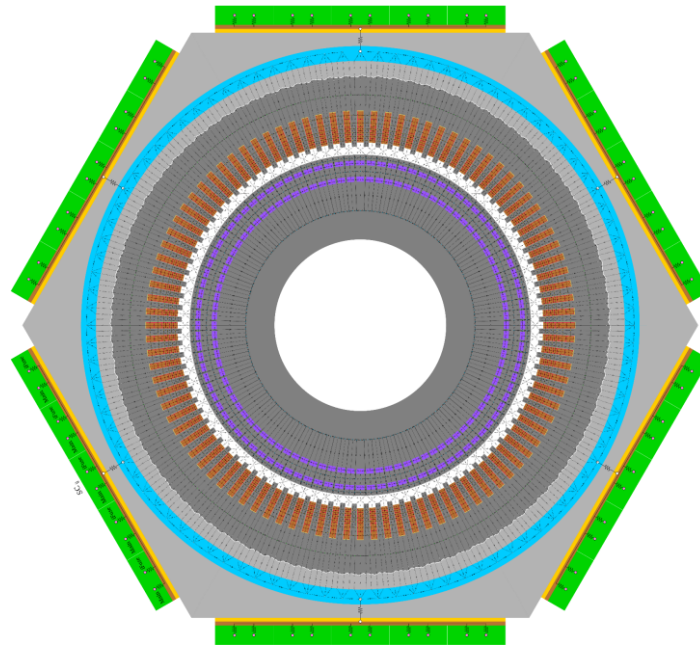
Schematic showing the front face of the complete three-dimensional thermal Model of the integrated motor and converter assembly.
